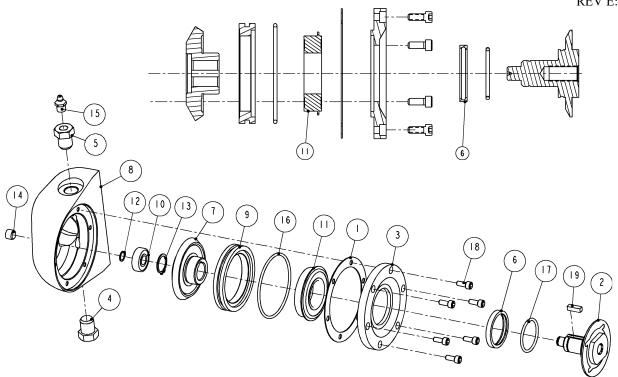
1302970: DRIVE SHAFT HOUSING - NOSE, STANDARD TORQUE
